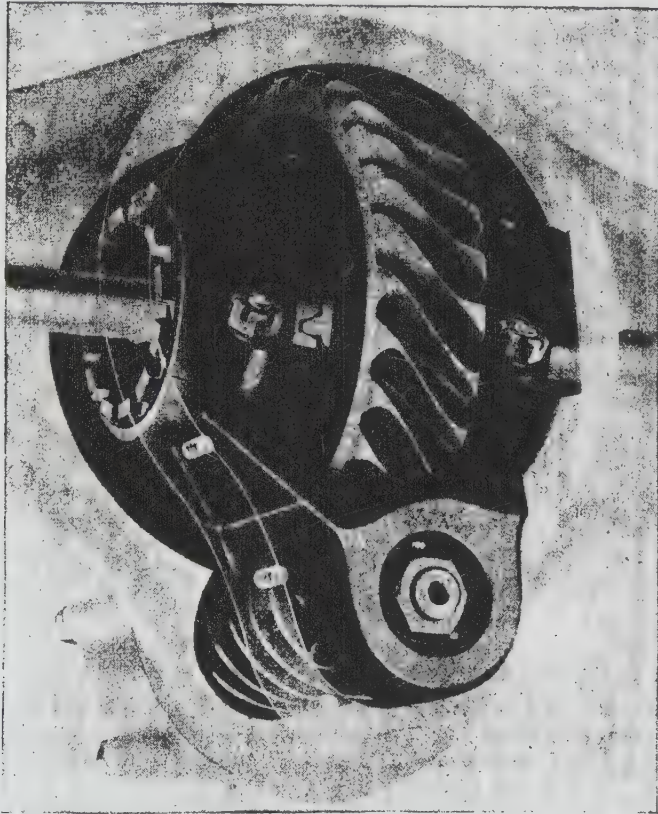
SHADOW VIEW OF WORM WHEEL AXLE.
